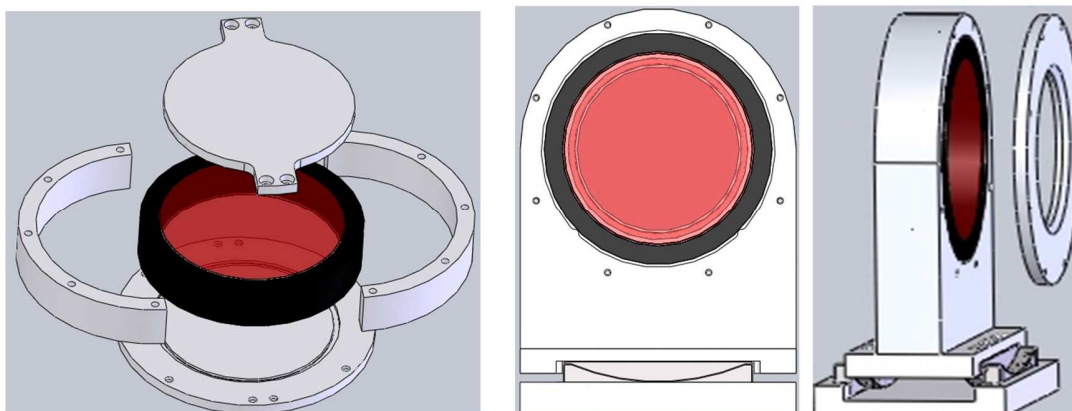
On left, expanded view of the test fixture to install the polymer on to the crystal. At right, a picture of the crystal holder with an exploded view of the mounting plate. The crystal holder has a manual goniometer at the base for minor adjustment of the crystal axis.
